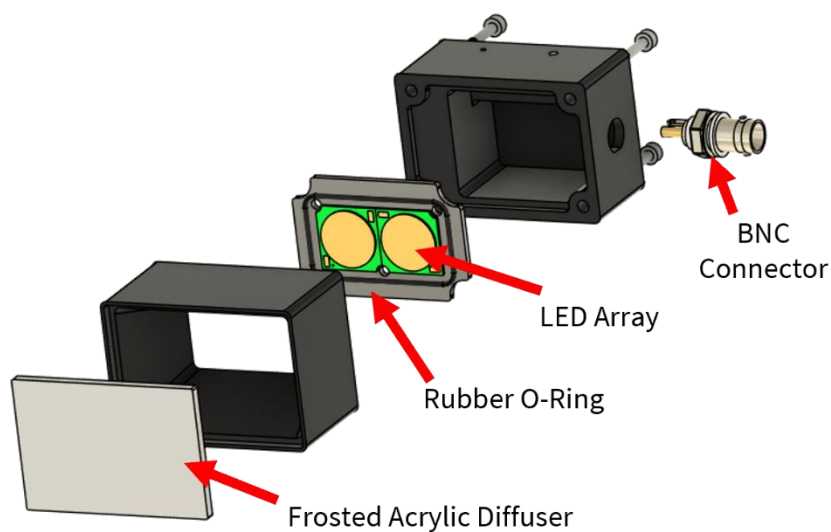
Exploded view of the design for the LED strobe assembly
